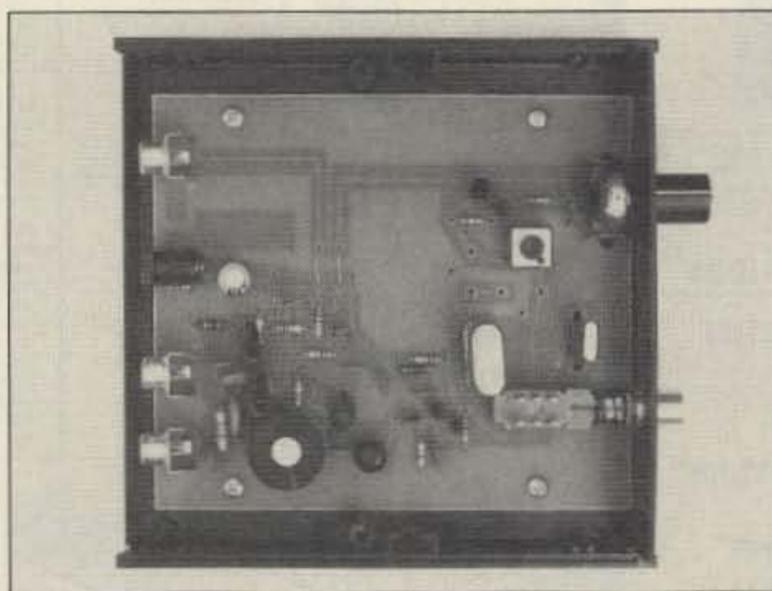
Photo A. Component side board of the QRP-40 transmitter. Parts installation is easy since the board isn't crowded.
